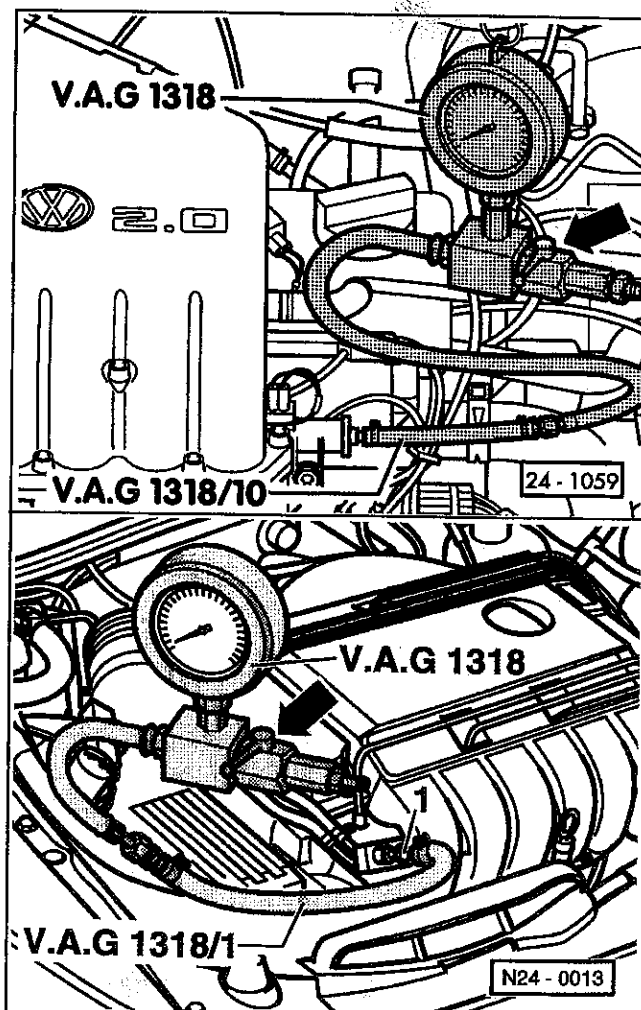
Fuel pressure gauge installation on ABA engine (top) and AAA engine (bottom). Remove the cap screw from the test port and connect the gauge line.
